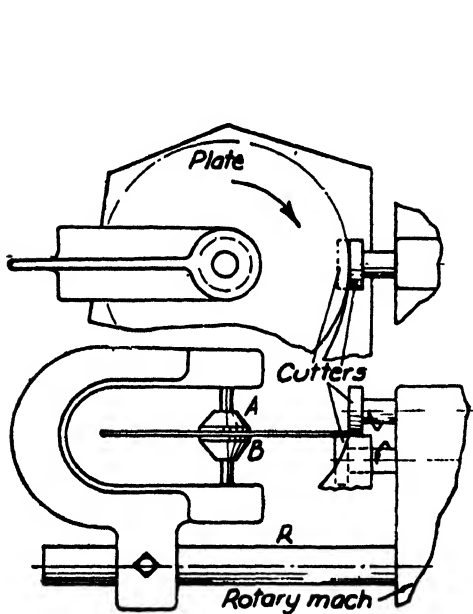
Circle-cutting Attachment for Rotary Shear.
